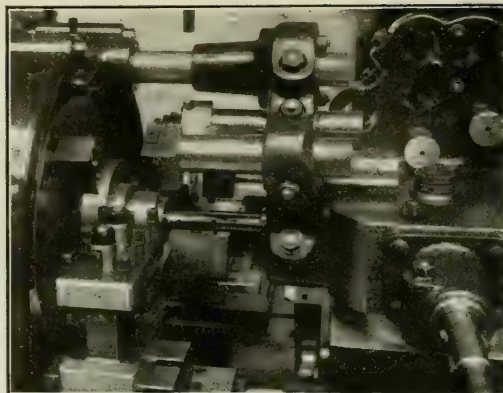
CLOSE UP OF THE SECOND OPERATION ON CLUTCH GEAR.
